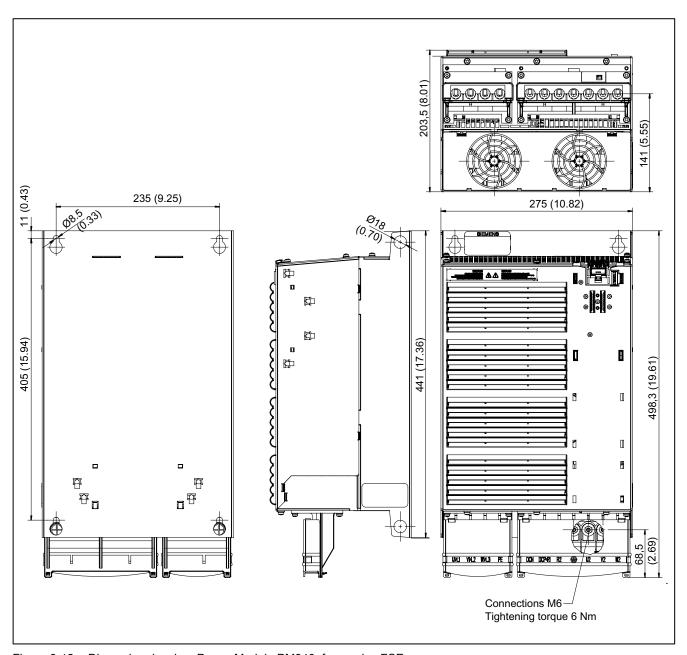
Dimension drawing: Power Module PM340, frame size FSE
